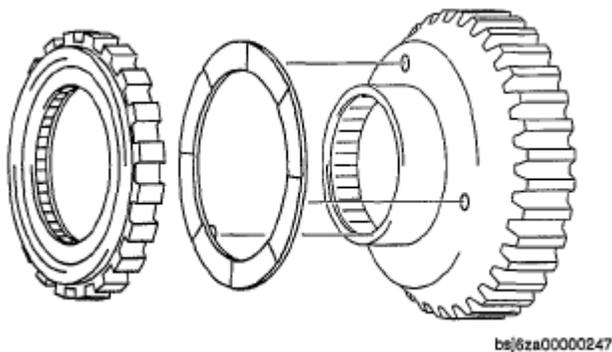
Identifying F1 One-Way Clutch And Thrust Washer
